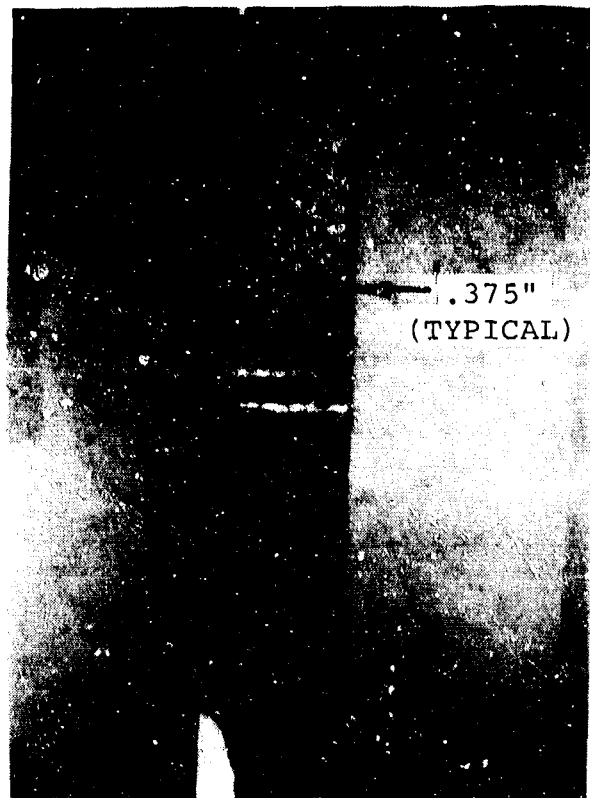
Photographs of Typical Fracture Surfaces for
